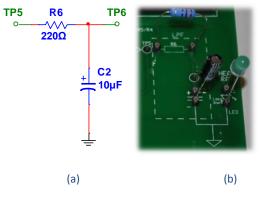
Low pass filter schematic (a) and Capacitor C2 assembly on PCB.
